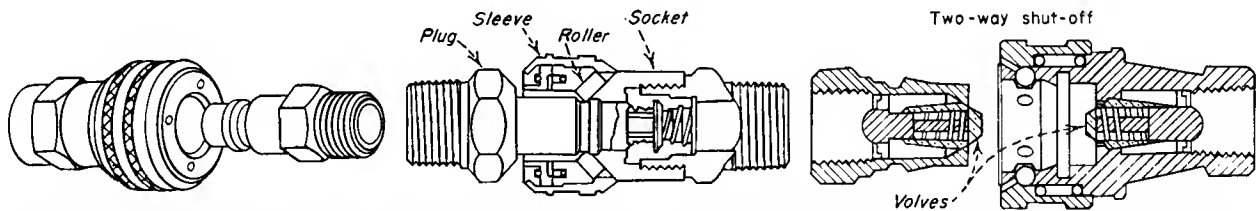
Two-way shut off fluid line coupler. To connect, the plug is pushed into the socket forcing valves apart and off their seats. Rollers maintain plug in socket.
